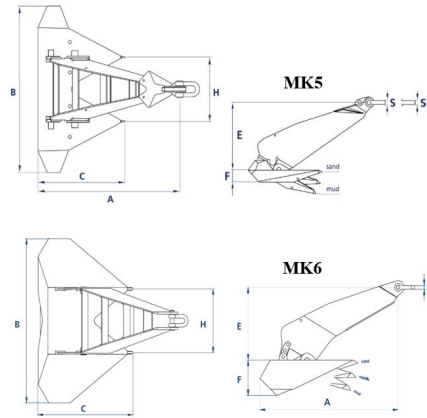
Schematic plan and side view of the modeled anchor in the present study
